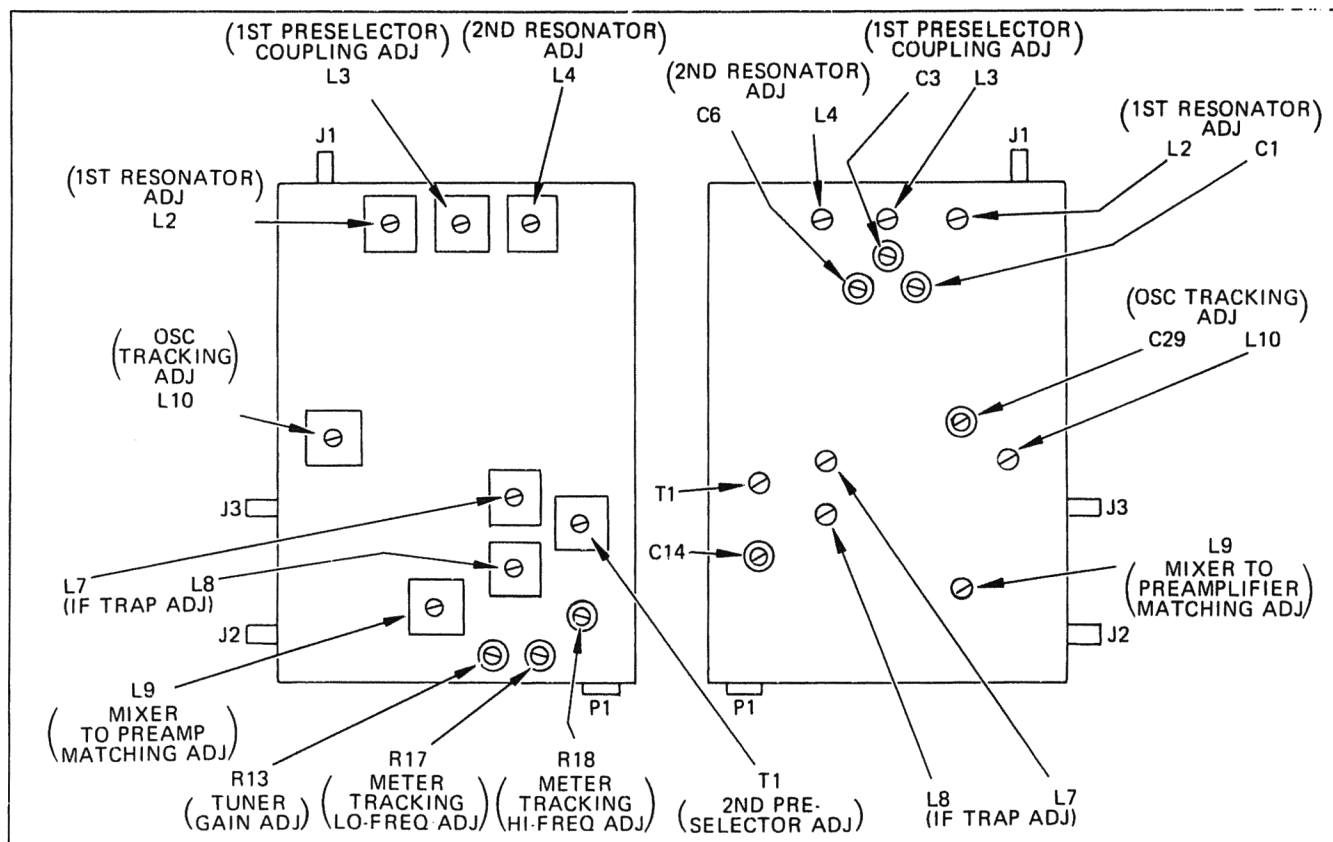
Trimmer Locations, Band 5 Tuner Assembly, A5
